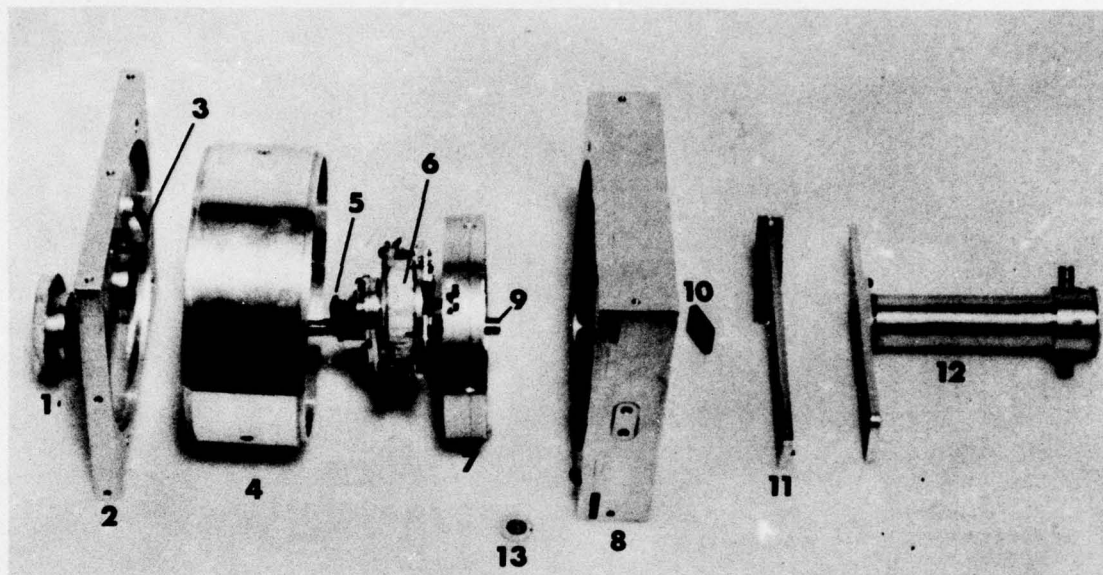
Exploded view of reader showing principal mechanical parts. (1) knob, (2) back plate, (3) cam, (4) cylindrical shell, (5) cam follower, (6) heater transformer, (7) rotatable cylinder, (8) supporting block with cylindrical surface 100 μm larger in radius than (7), (9) axle, (10) optical filter, (11) filter holder, (12) photomultiplier case, (13) dosimeter.
